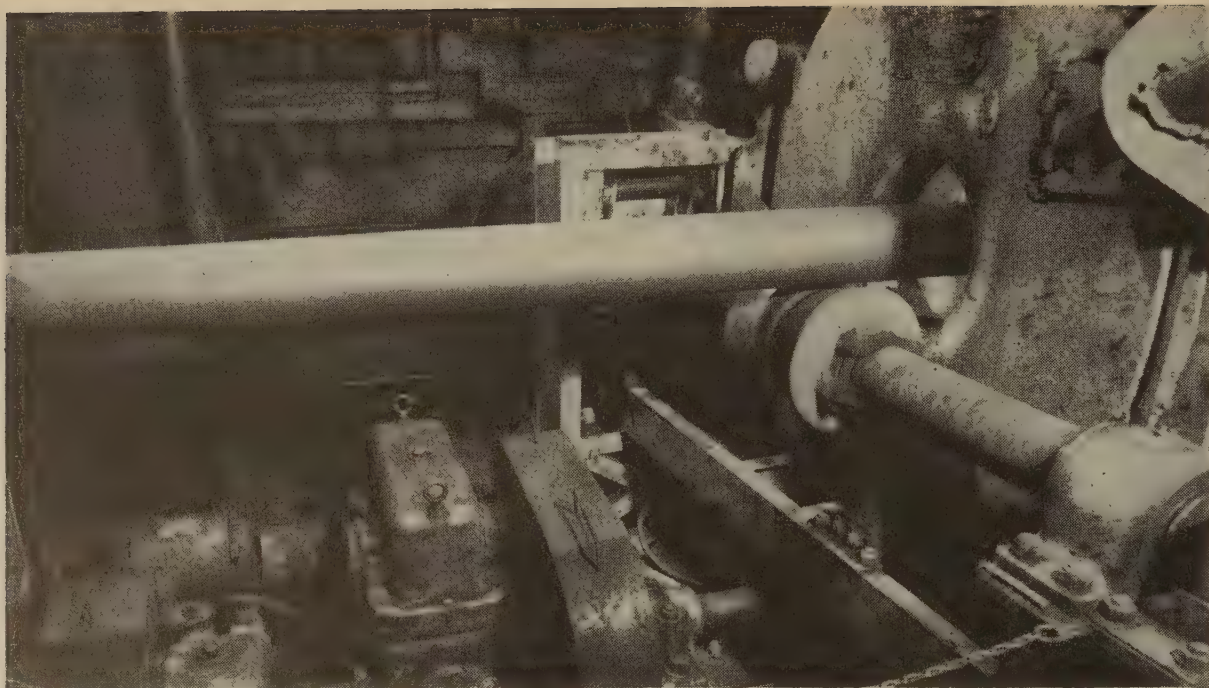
Close-up view of a tube entering the first heating furnace. The mechanism in the lower foreground forms the drive for the cam shaft that adjusts the position of grooved rollers supporting tubes in their travel.
